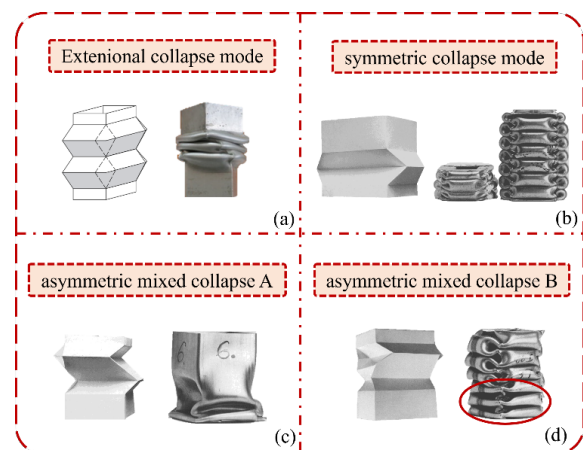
Folding patterns of box-shaped tubes under axial crushing^[13, 15]
